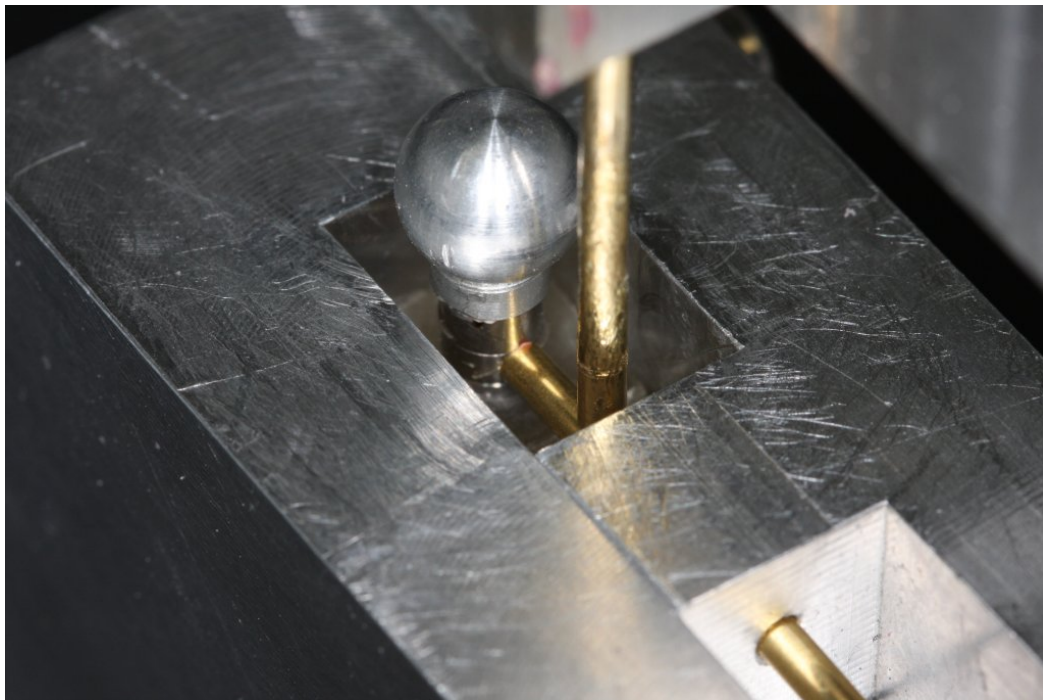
Detail view of the rod arrangement in the diagonal view.
